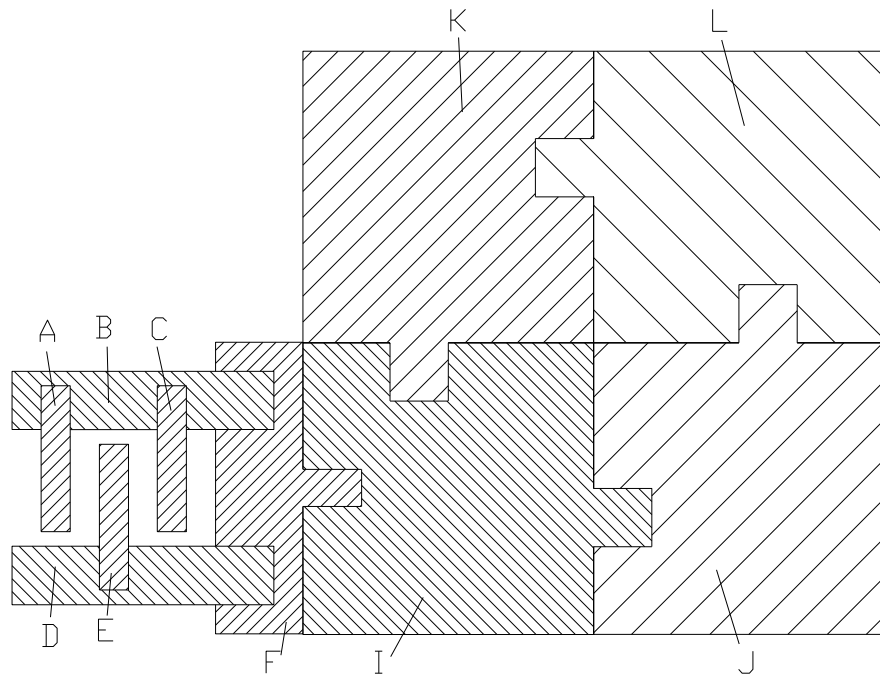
A product that can be assembled with a NC-S-NL-M assembly
